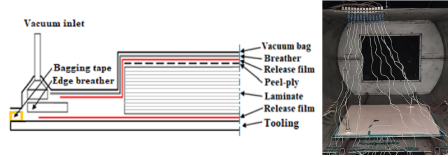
Left: vacuum bagging scheme of the manufactured panels. Right: autoclave setup ready to cure a batch of CFRP panels.
